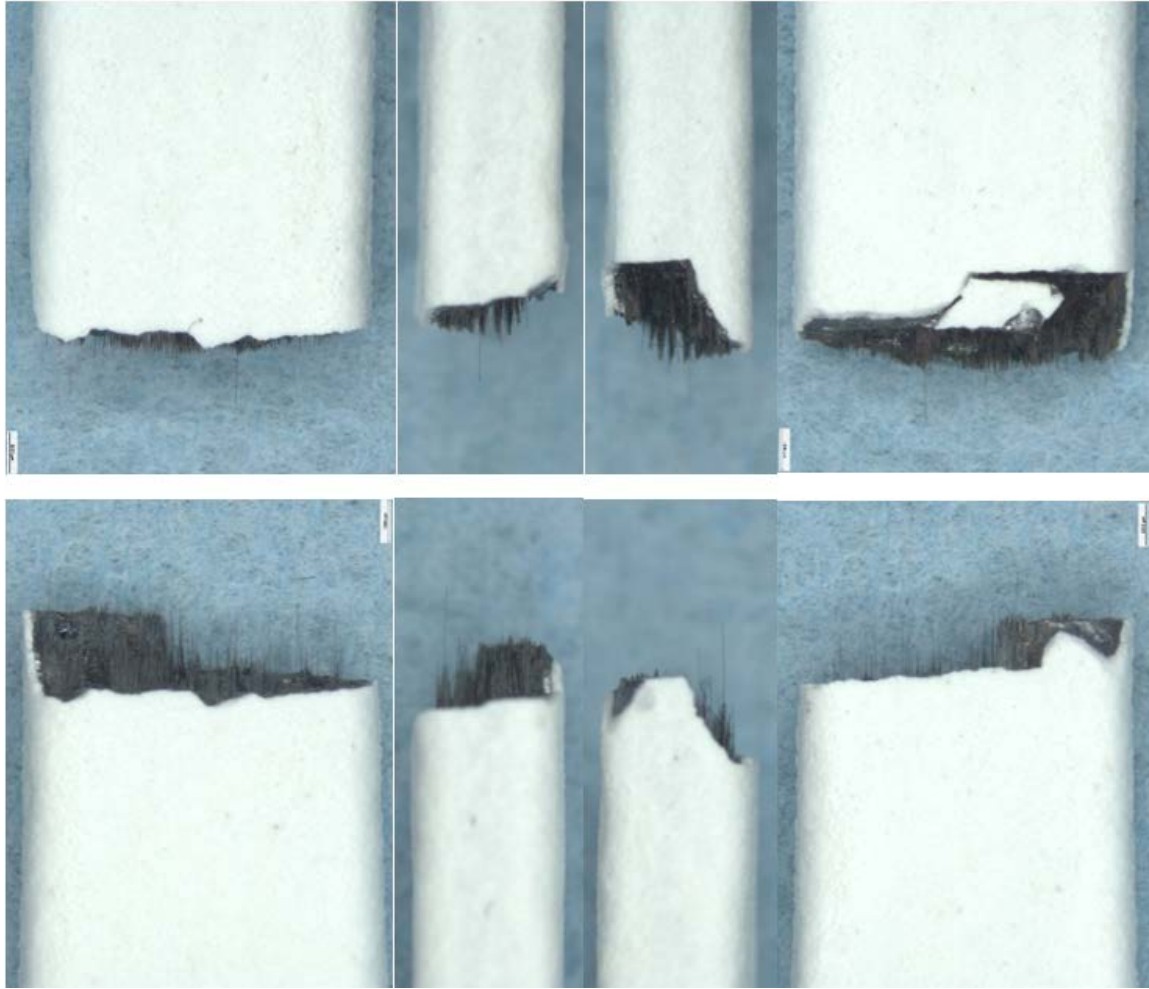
Fracture surfaces of specimen P15004-7, tested in fatigue at 1200°C in air.
